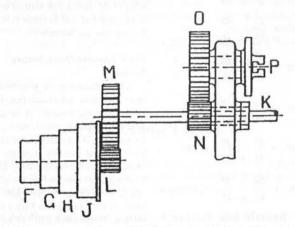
Arrangement of Cone and Gearing on a Double-Geared Traversing Head Shaping Machine.
